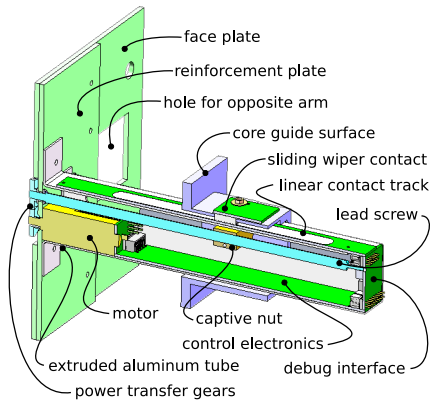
Cutaway view of prismatic arm assembly with internal linear actuator and control and latch mounting face.
